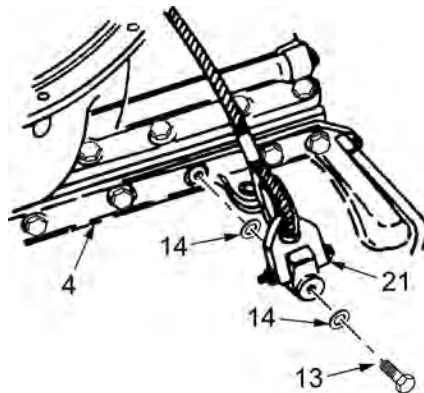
Attachment of Multiple-Leg Sling on Left Cover Assembly.
